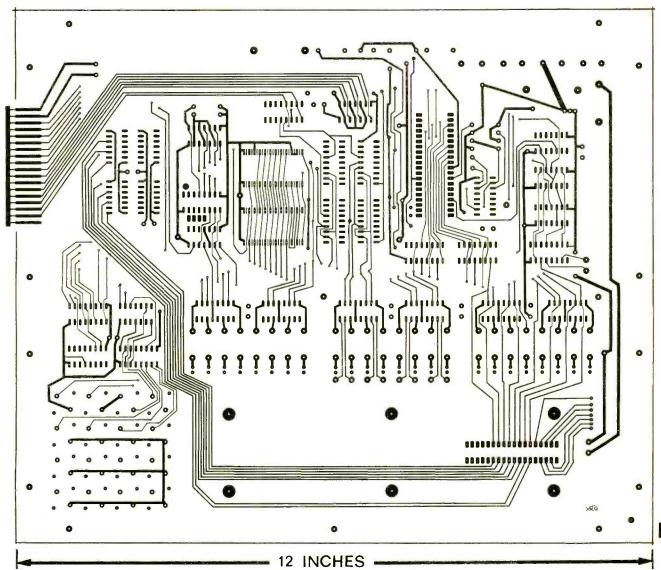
FOIL PATTERN of the bottom of the double-sided board. A board with plated-through holes is recommended.
